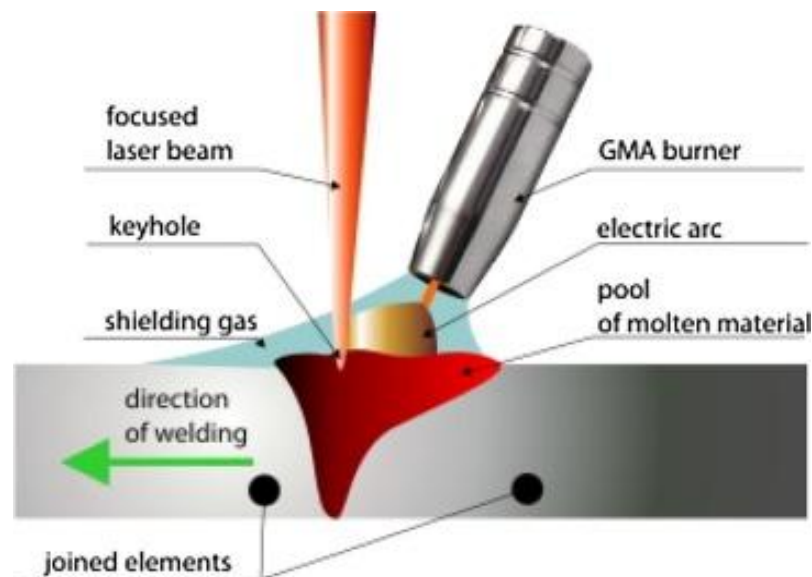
The scheme of hybrid laser welding.
